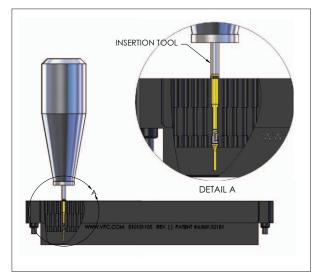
Figure B. Ensure that the tool is kept perpendicular to the module face to avoid damage to either the contact or tool.
